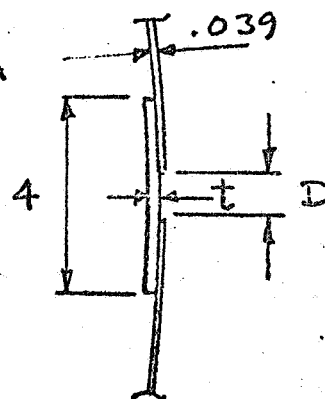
Design Configuration - Weld-Bond Joint
